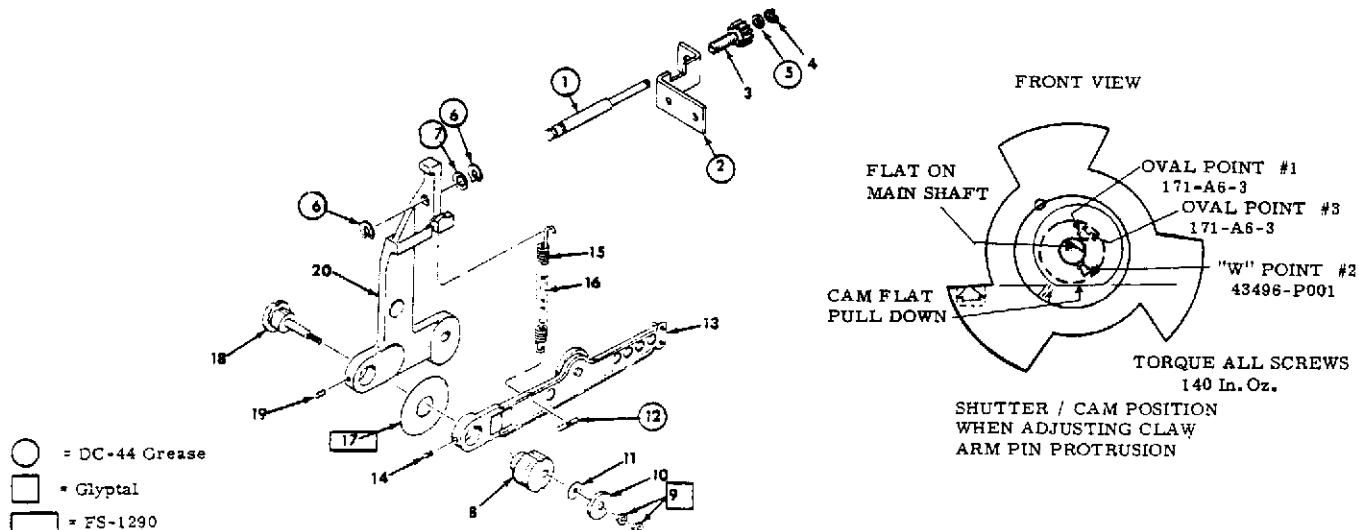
REMOVAL AND REASSEMBLY OF CLAW ARM
